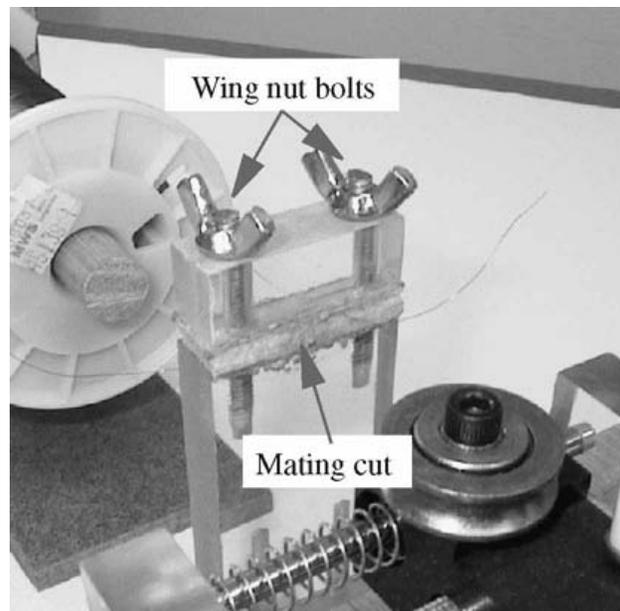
The design principle of cut mating forms from the same part stock. The holes for the bolts are drilled first. Then, the mating stock is cut into two pieces.
